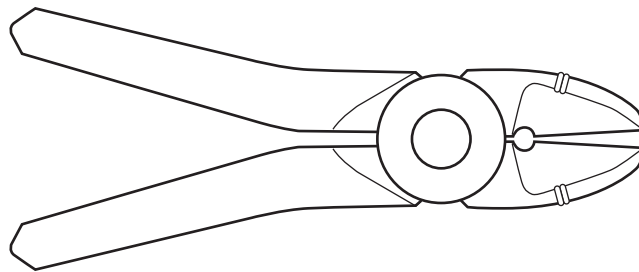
Type I, Alternate Design With Cushion Grip Throat
